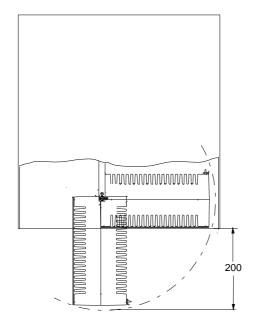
Mounting Data for FlexPak 1200/1600 A, 500V and 1600A, 575/690V
